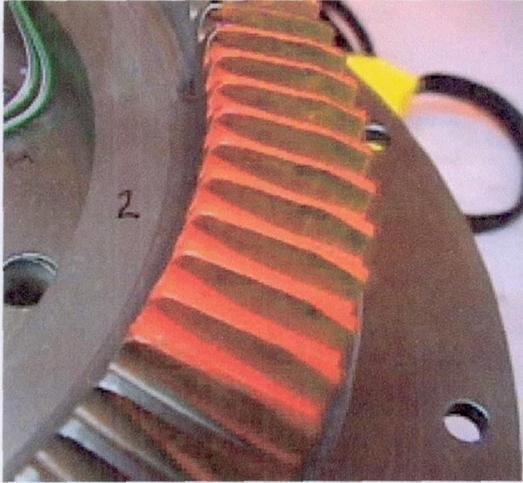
Full Load Tooth Contact Patterns Upper Face Gear Teeth
